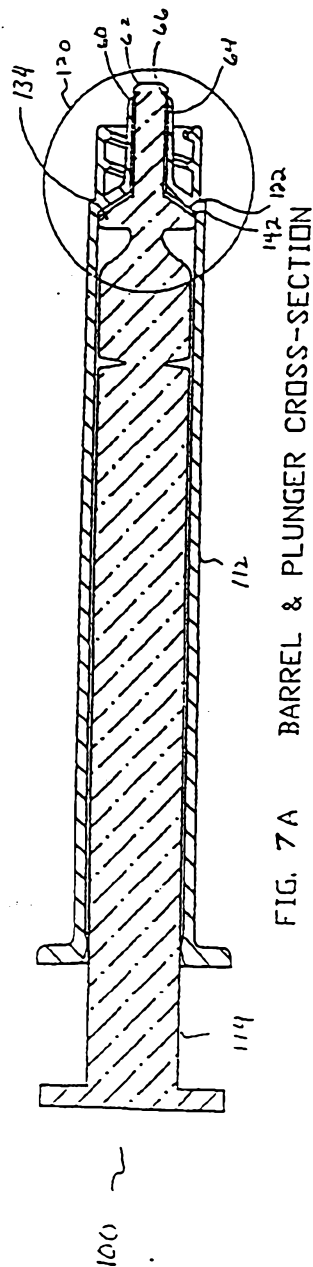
A BARREL & PLUNGER CROSS-SECTION
